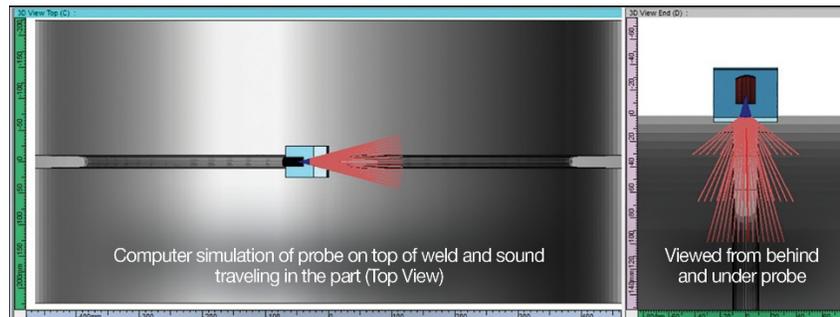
Ultrasonic inspection of a circumferential shell-to-shell weld in a layered pressure vessel [2].
